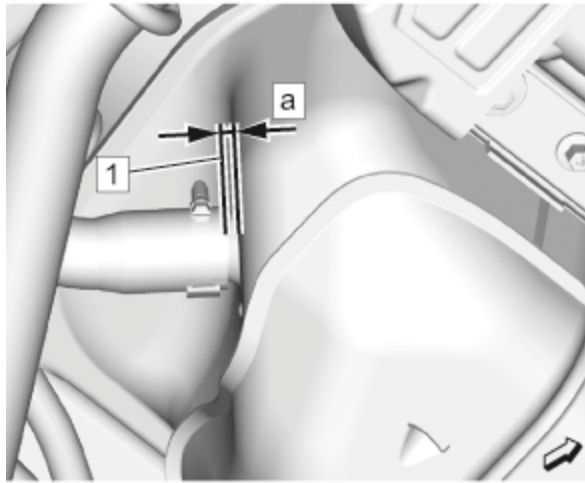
Ensure Filler Hose Is Fully Seated And Installed Correctly
